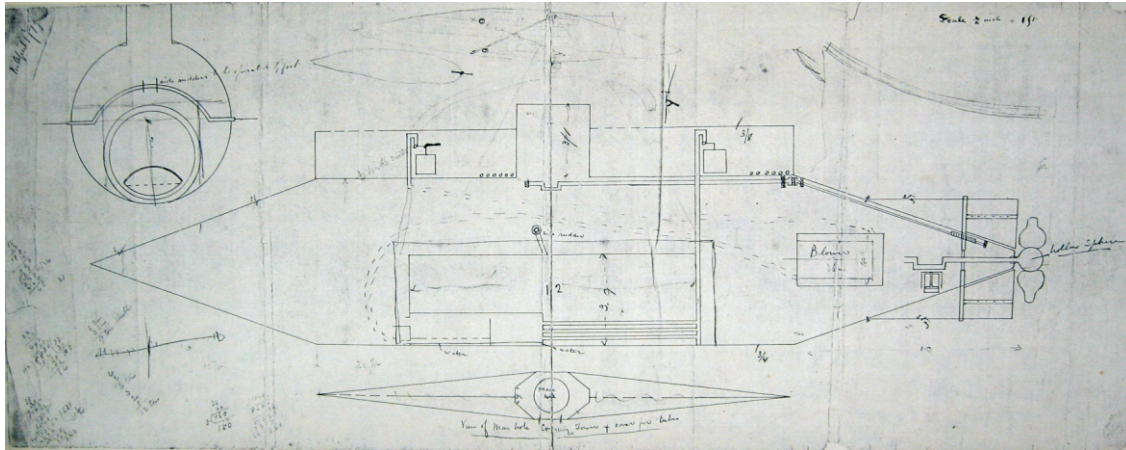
Resurgam* plan sent by George Garrett to builders at Cochran and Sons in Birkenhead
